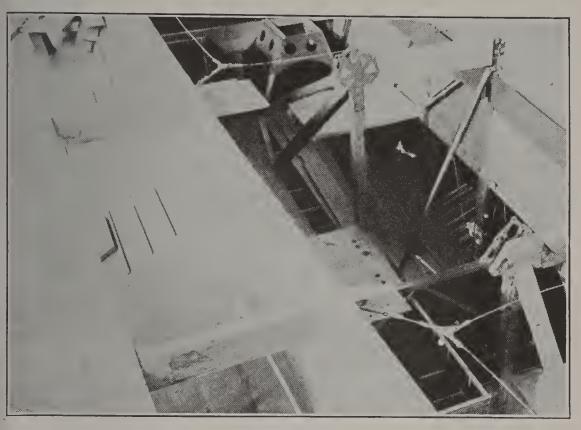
DETACHABLE SIDEWALK PANEL PARTLY REMOVED. LOOKING FORWARD.
